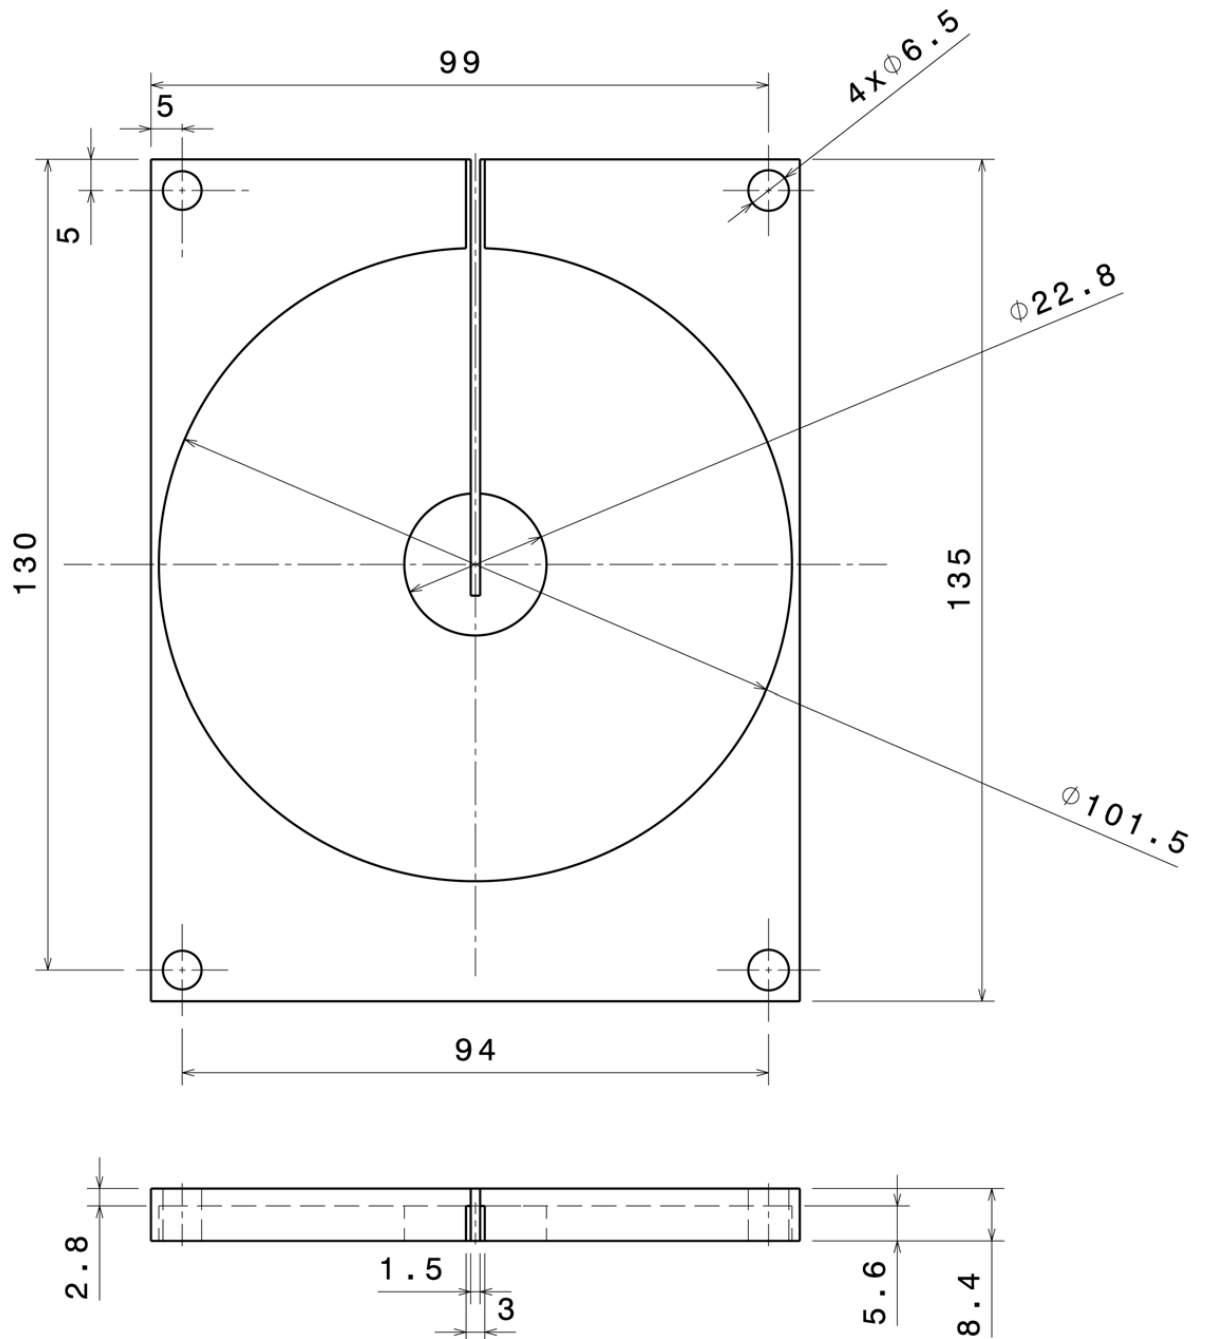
Mount of a neighbor coil (dimensions in millimeters).
